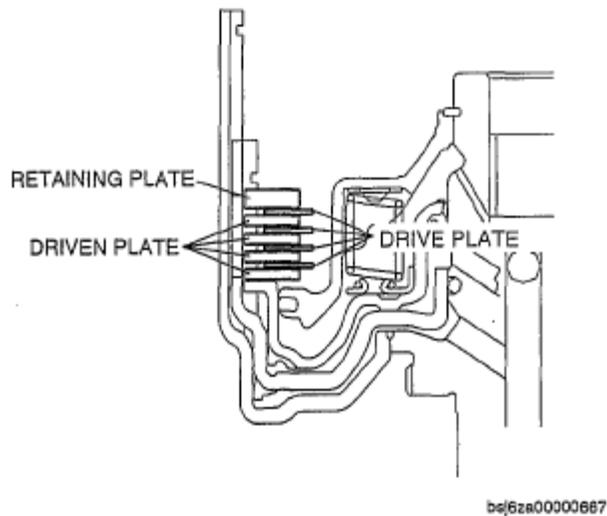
Identifying Retaining Plate, Drive And Driven Plate
